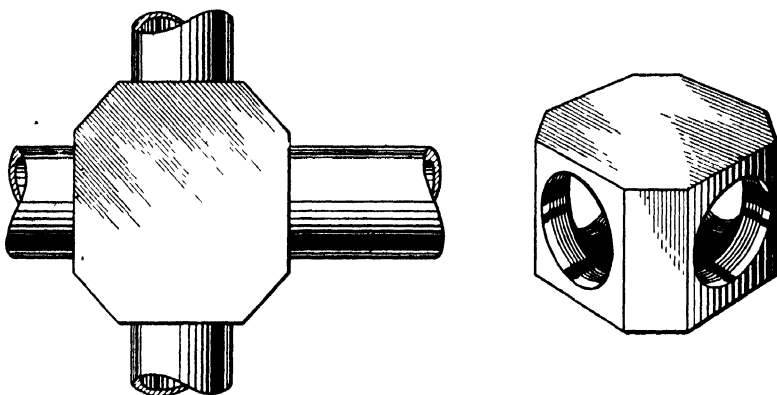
CROSS JOINT PRODUCED IN SIZES OF 1 in., 1½ in., 2 in., 2½ in., 3 in and 4 in.
